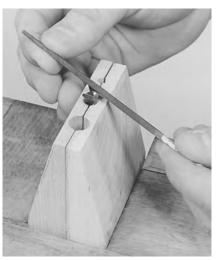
File from the back of the cutting edge to the front on the side cutters.
